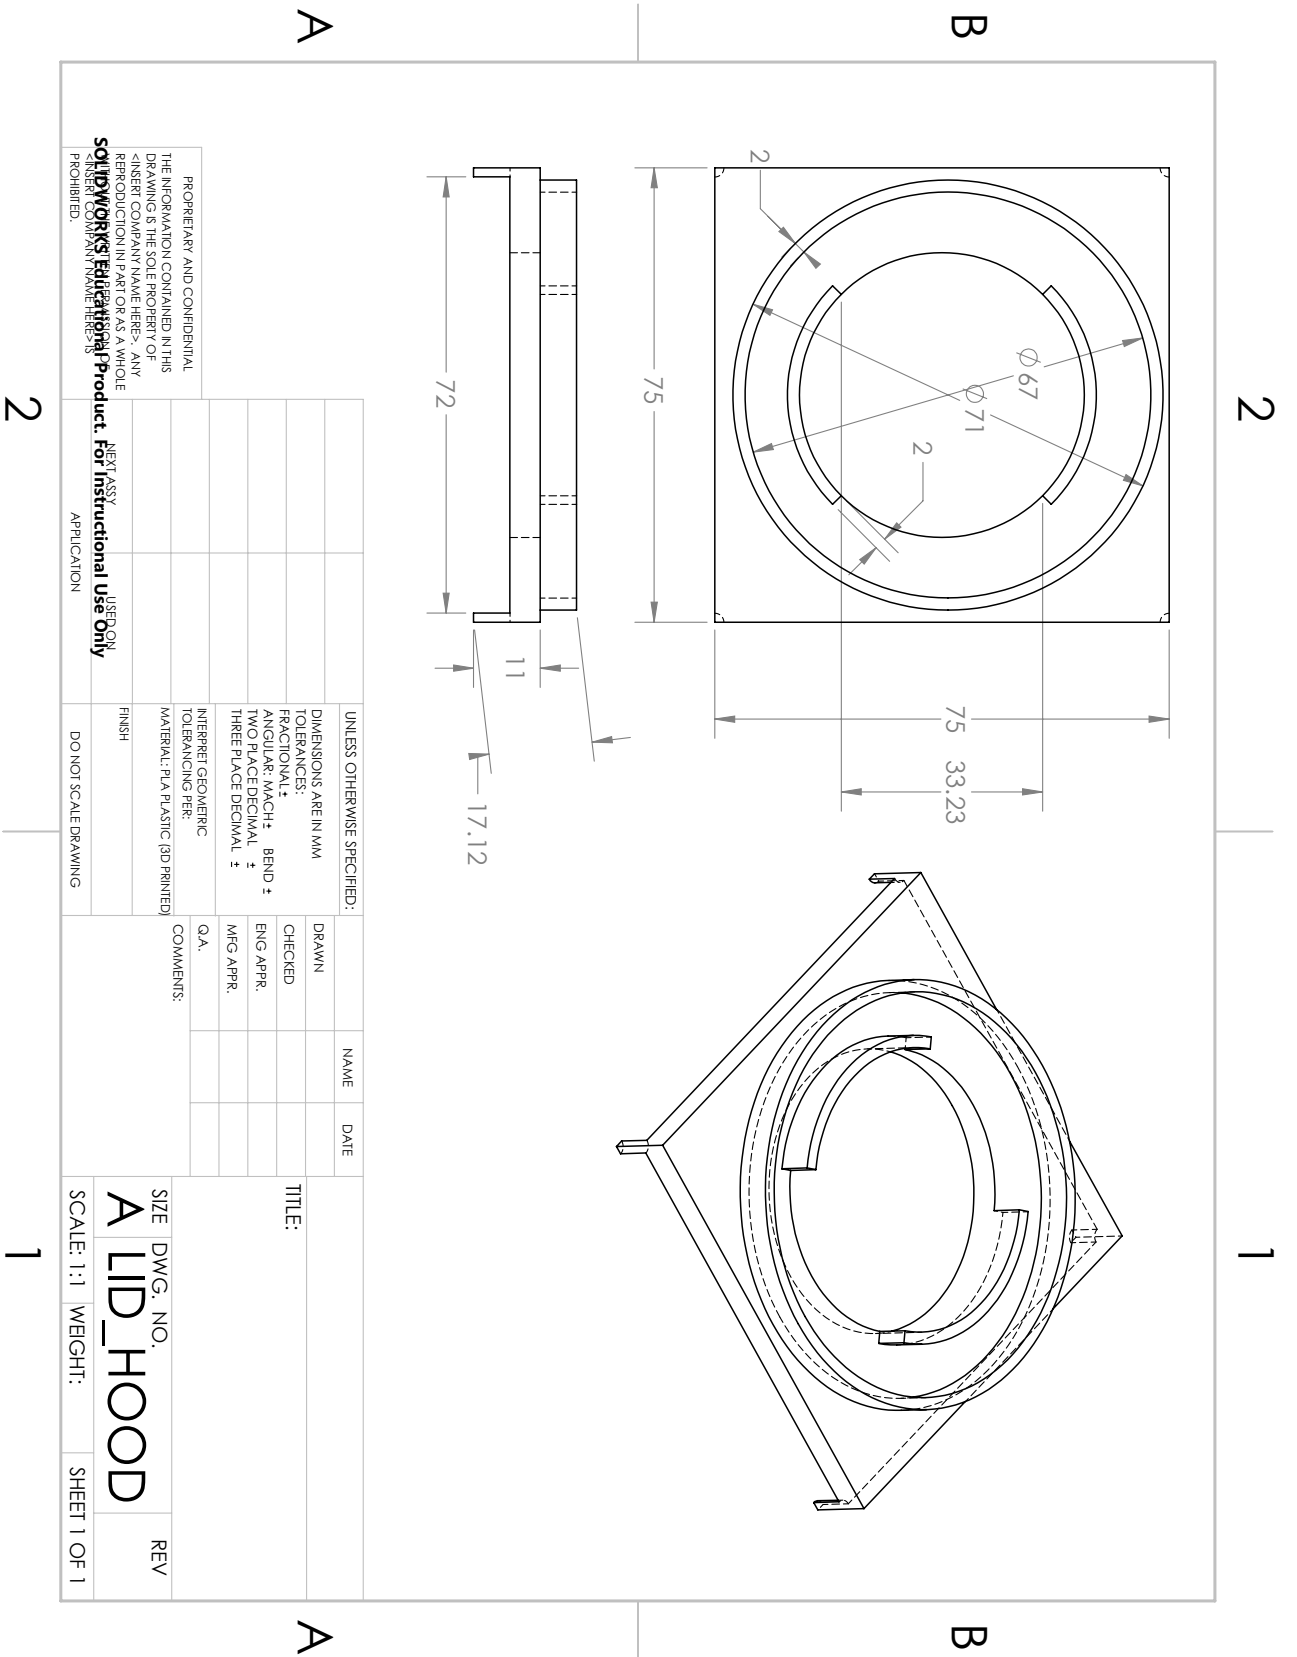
Technical drawing of the lid of the enclosure, showing the dimensions.
